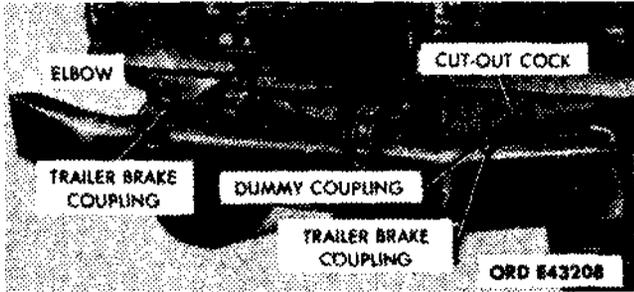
Trailer brake coupling installed at front of vehicle.
